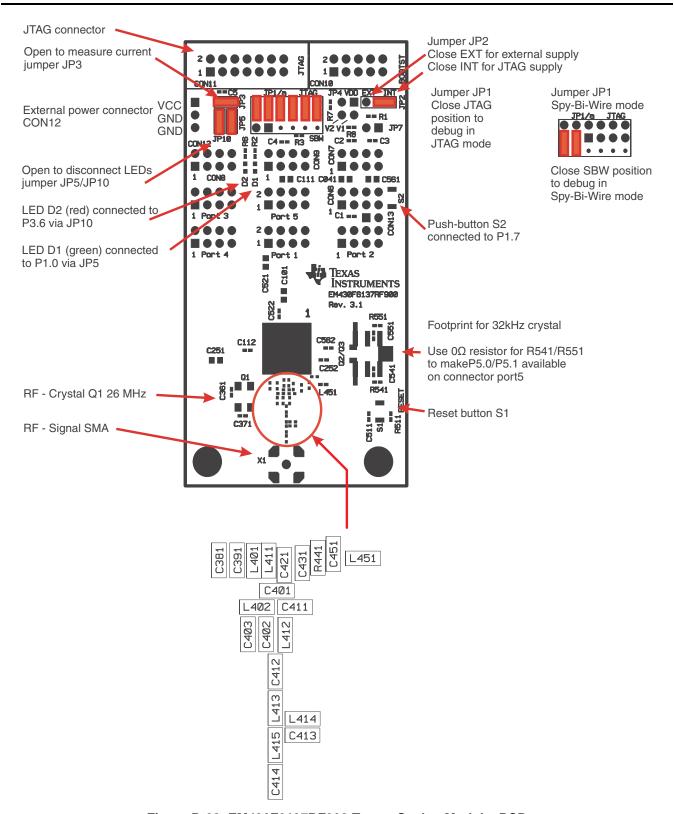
EM430F6137RF900 Target Socket Module, PCB
